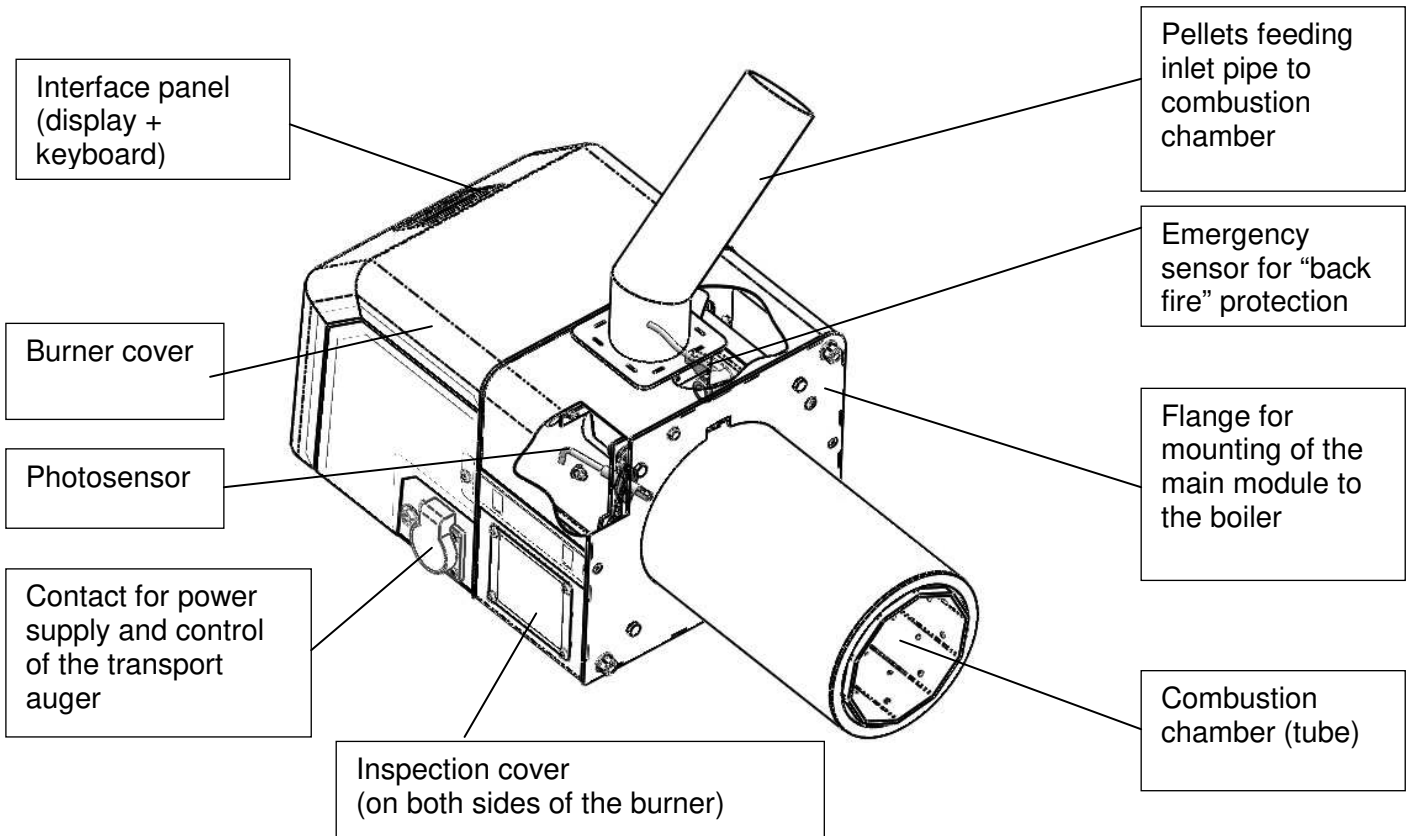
Main view of tube pellet burner Bisolid GP xx R tsc
